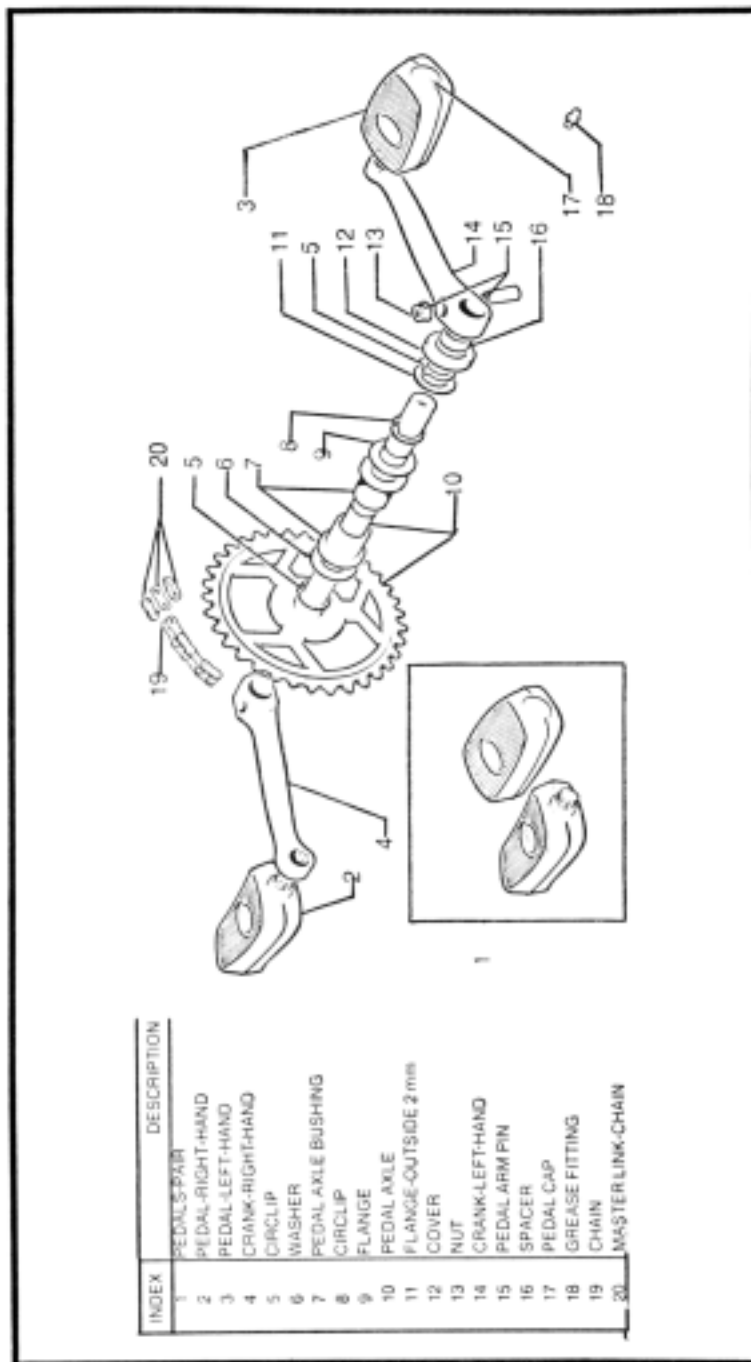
Motobecane pedal crank assembly. The driven pulley floats between spring clips 5 and 8.
